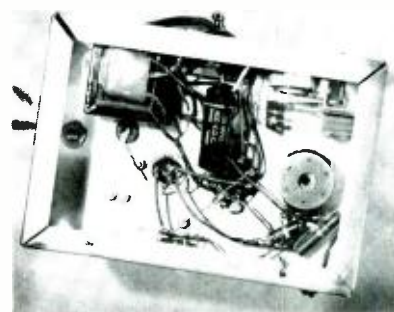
Interior view of chassis emphasizes compact arrangement of components.
